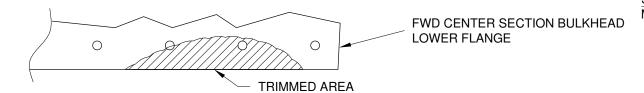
TRIMMING THE FWD CENTER SECTION BULKHEAD LOWER FLANGE
